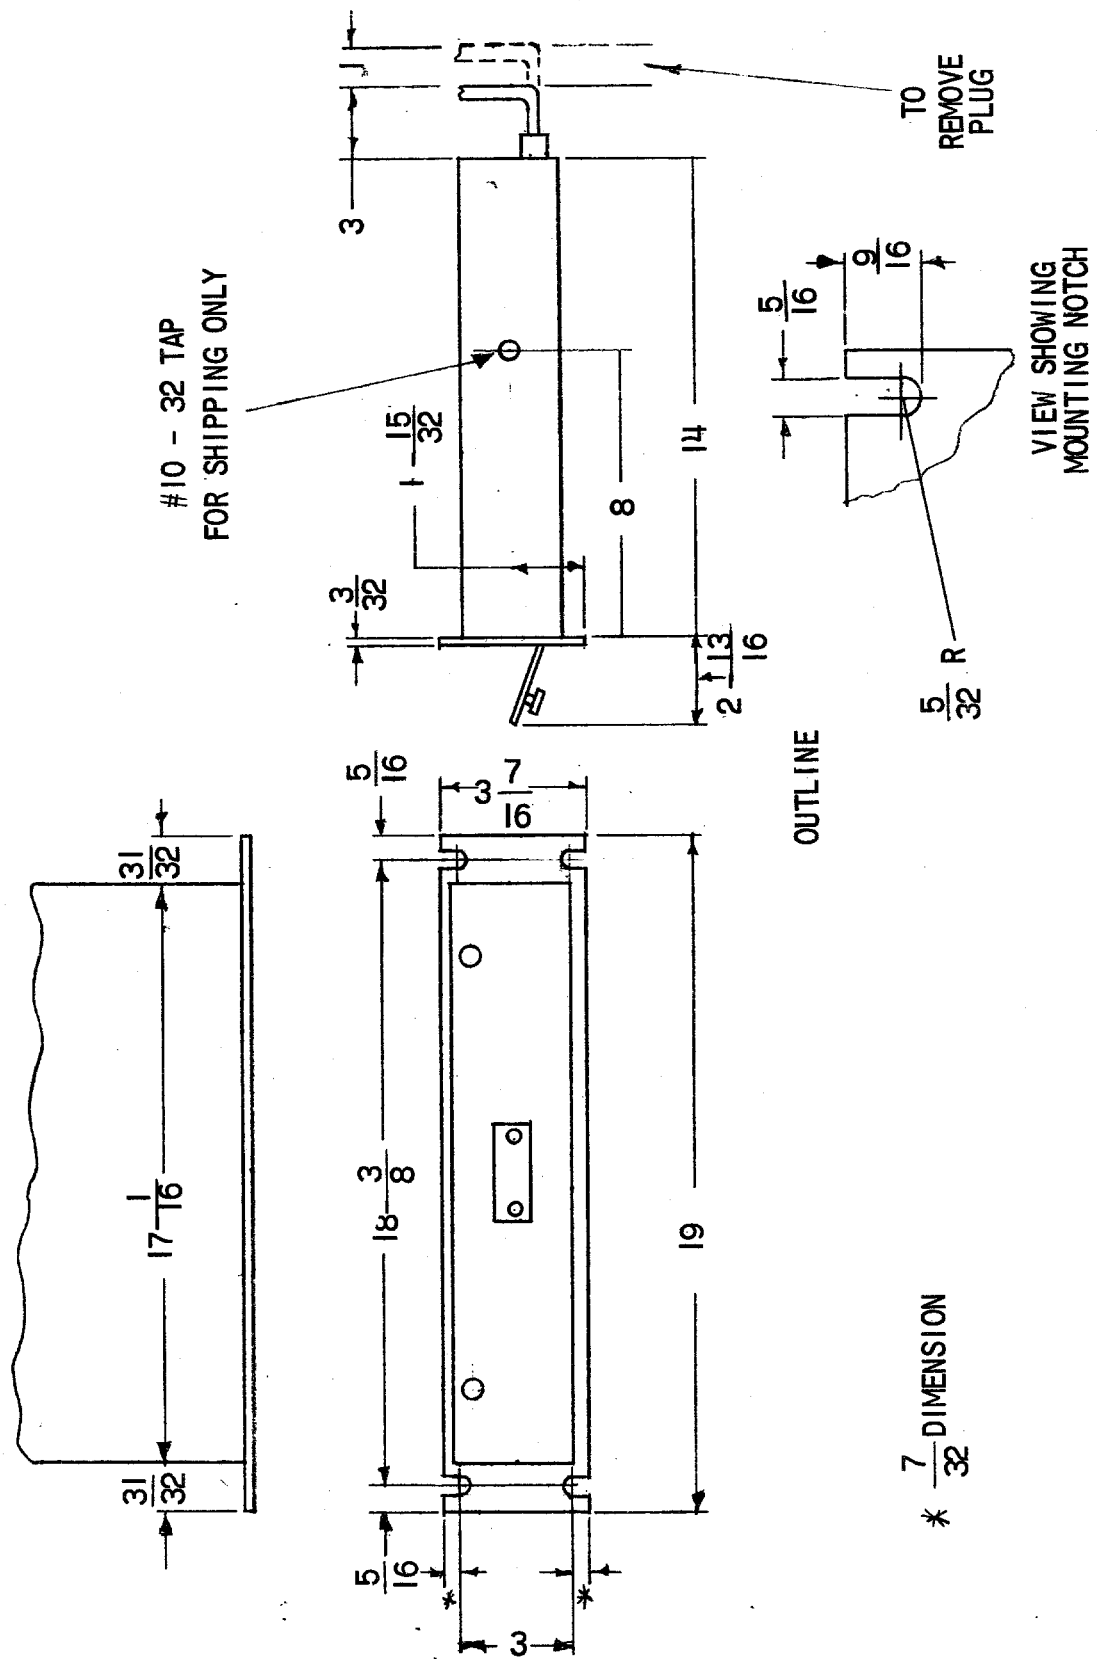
(0227A2036-0) OUTLINE AND MOUNTING DIMENSIONS FOR THE TYPE SLAT51H RELAY
